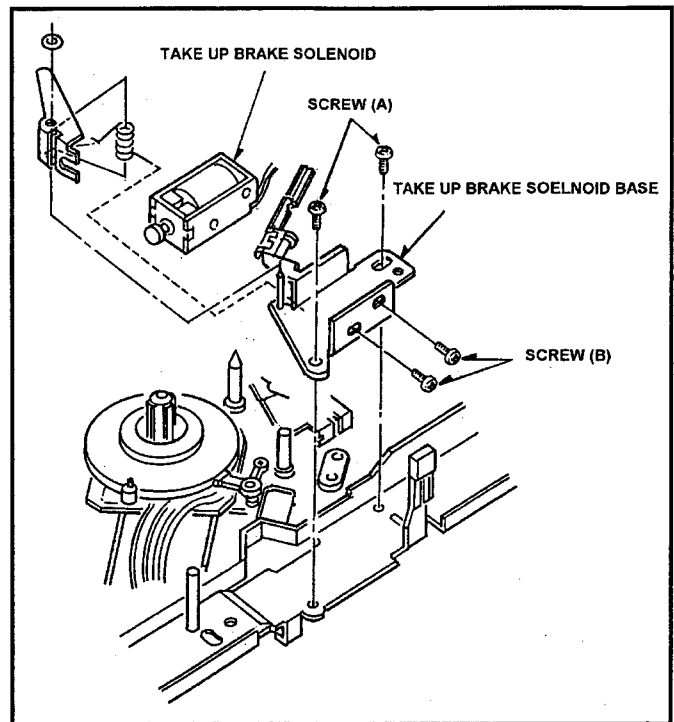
Removal of Take Up Brake Solenoid
